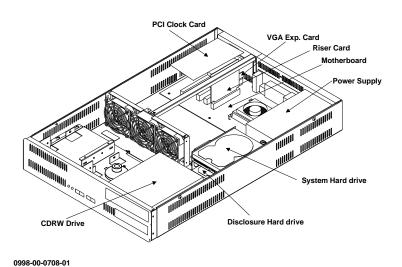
Central Station, ViewStation, WorkStation, and Gateway (0998-00-0708-01)
